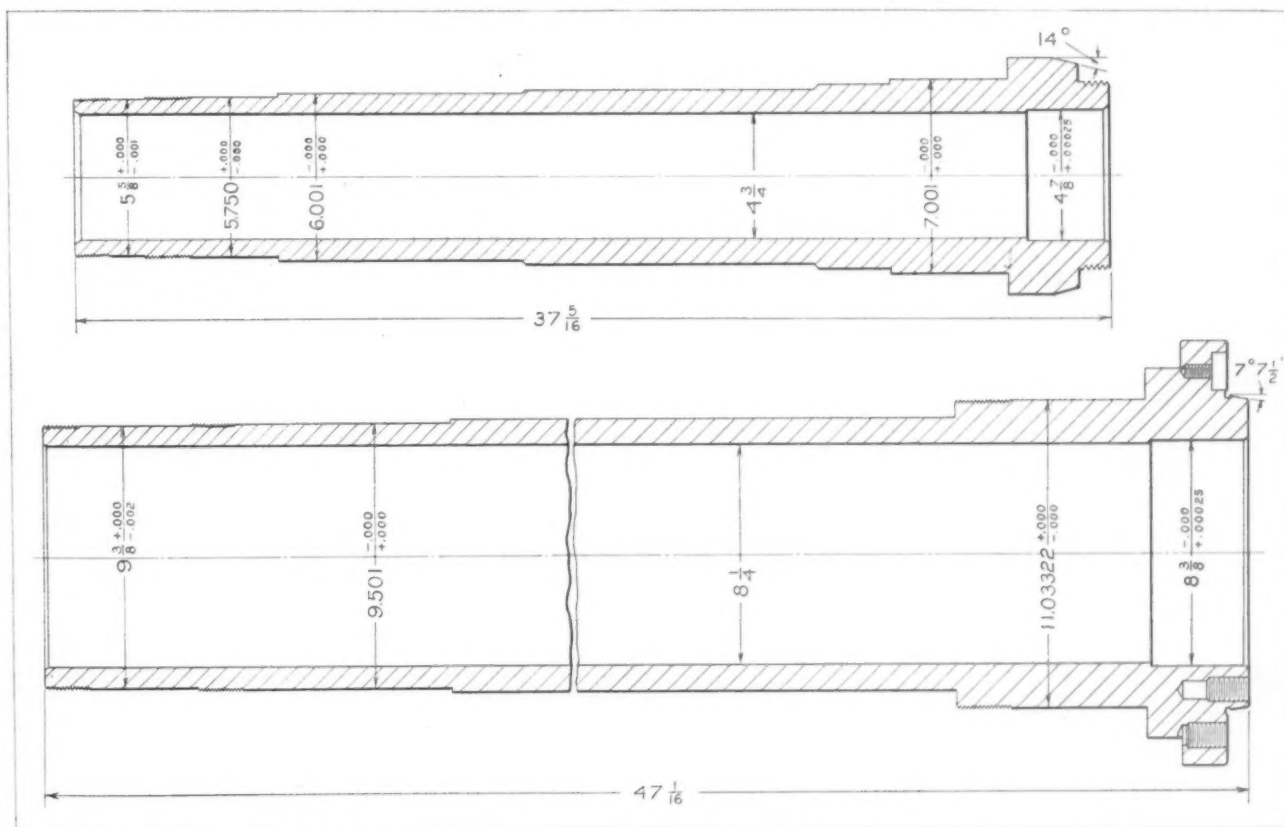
General Design of Two Spindles for Turret Lathes, the Upper One Having a Threaded Nose and the Lower a Flanged Nose
